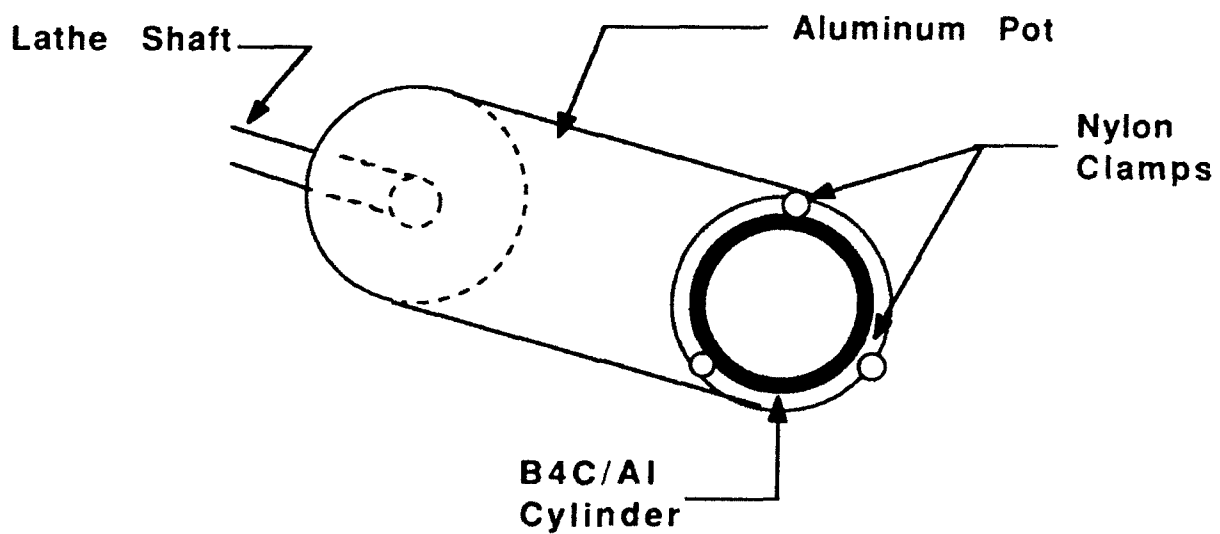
Fixture for grinding the internal diameter of the cylinder after its external diameter has been already ground to net dimension.
